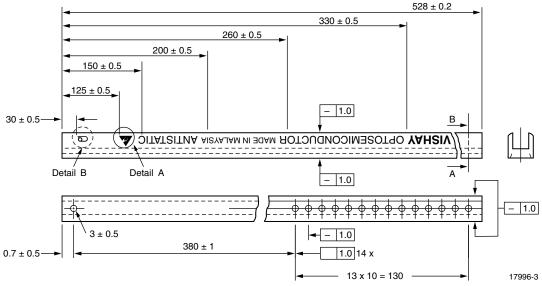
Shipping Tube Specifications for DIP-8 Packages
